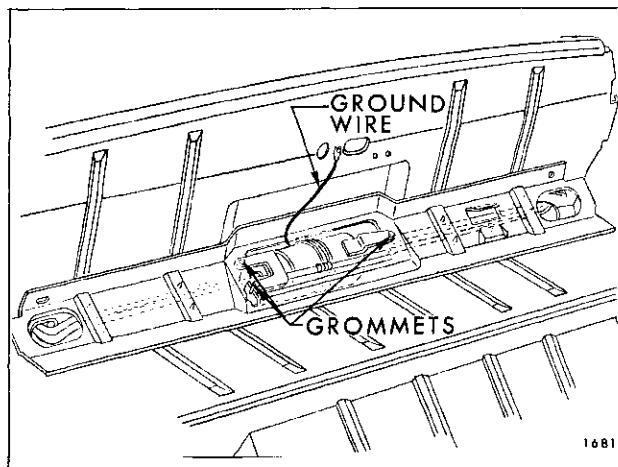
Hydro-Lectric Motor And Pump Assembly
